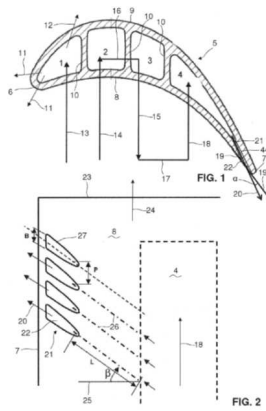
View of the shaped holes on the pressure side of the gas turbine airfoil [63]
